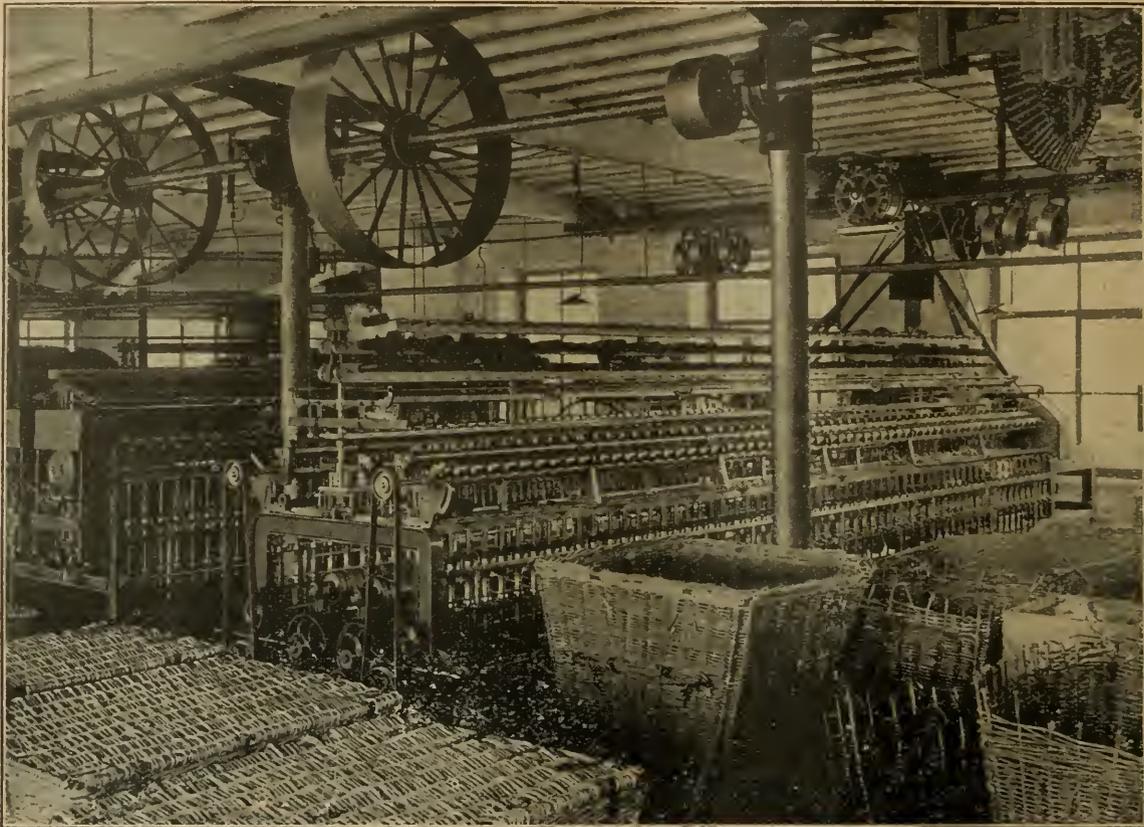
WOOLEN MILL—TWISTING FRAMES (SHOWING PART OF DISUSED MILL GEARING AND PULLEYS).
